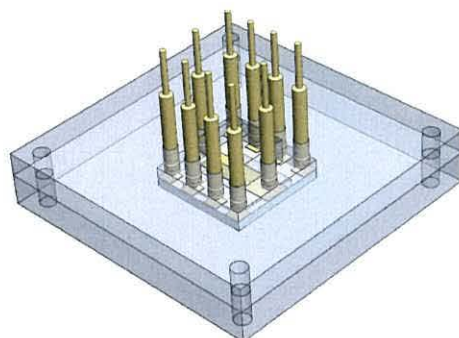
Sample holder test jig used for charge injection device measurements.
